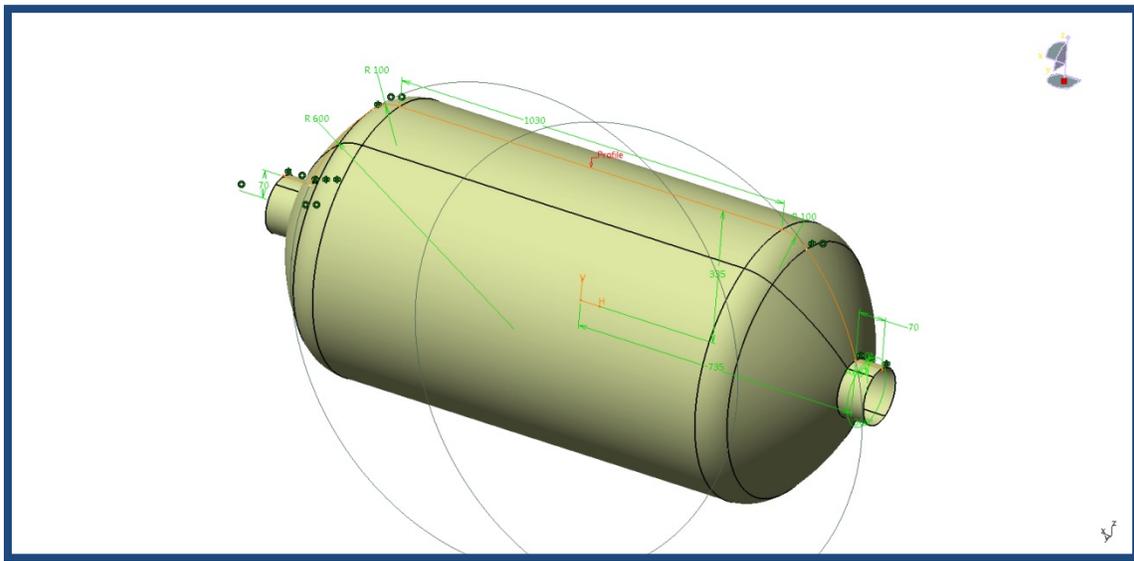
Drawing Specifications for the Cylindrical pressure vessel.
